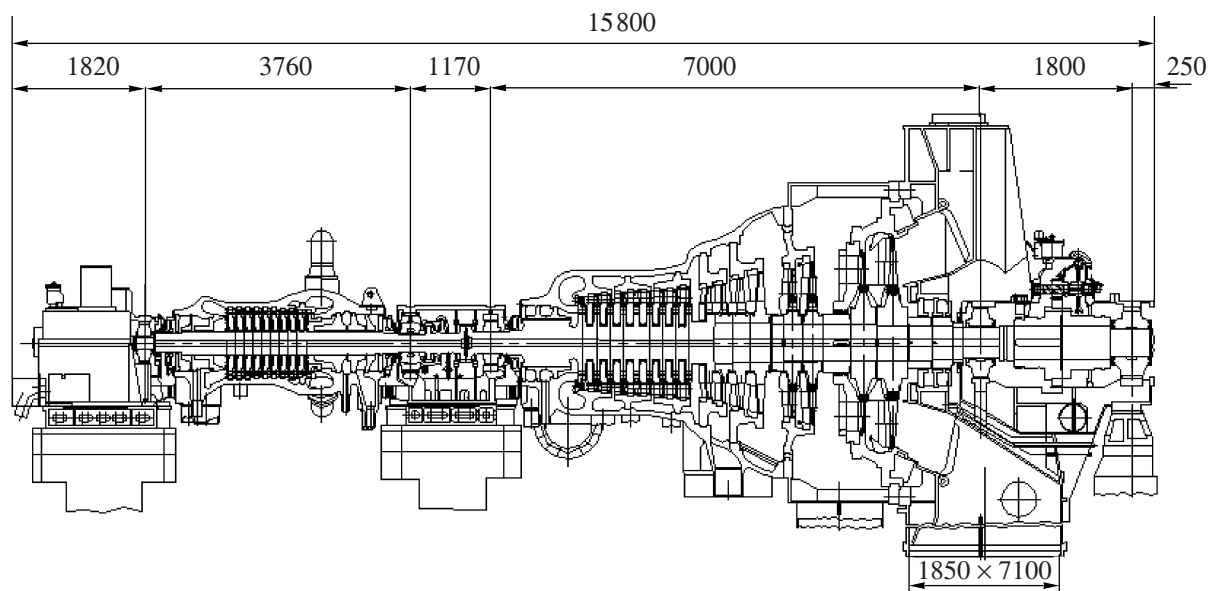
Type T-130/130-12.8-1 steam turbine.
